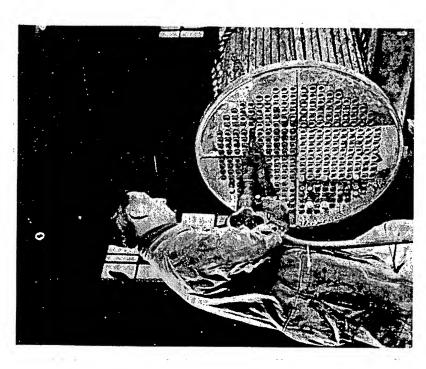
Expanding the ends of the tubes into the tube plate of a heat exchanger bundle
